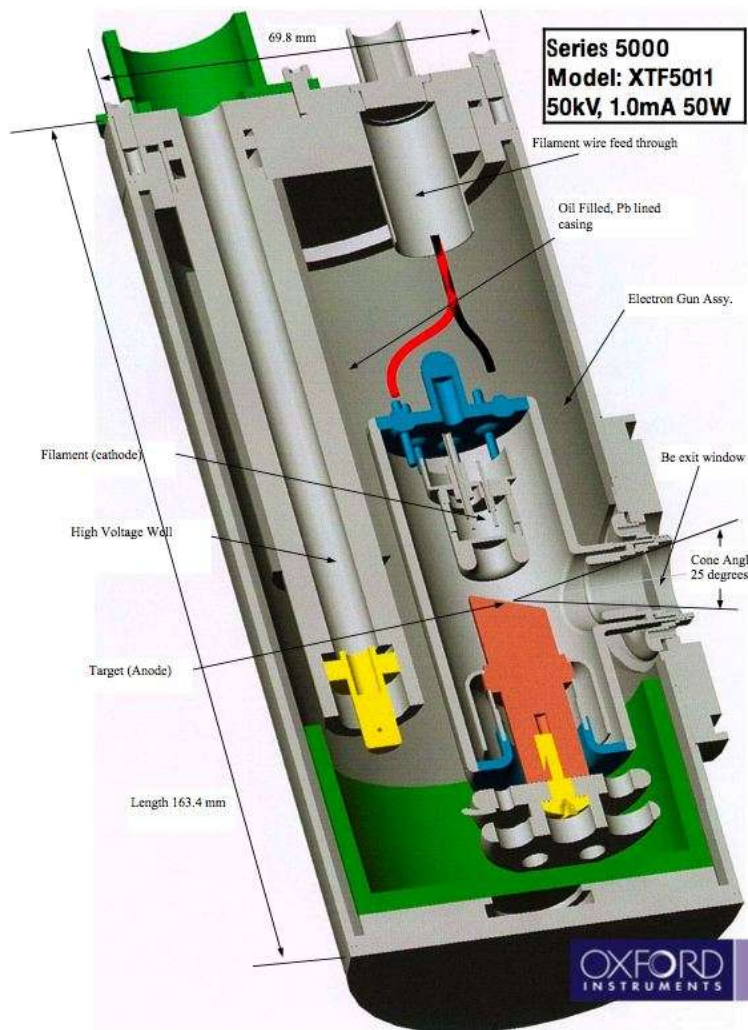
Cross-sectional view of an Oxford X-Ray tube⁹, the design of this tube is similar to that used on the bench-top unit
